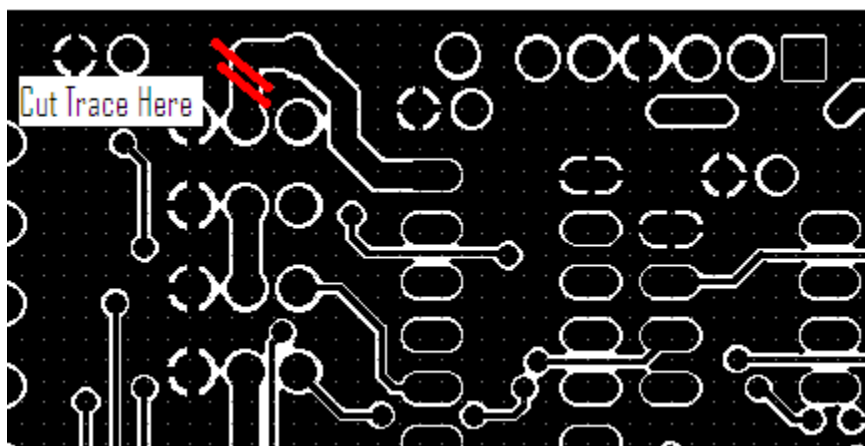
Cut Trace on Oil Pan rear (solder) side.
